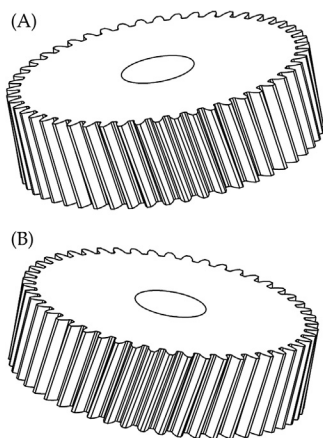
(A) Left-hand helical gear; (B) right-hand helical gear.
